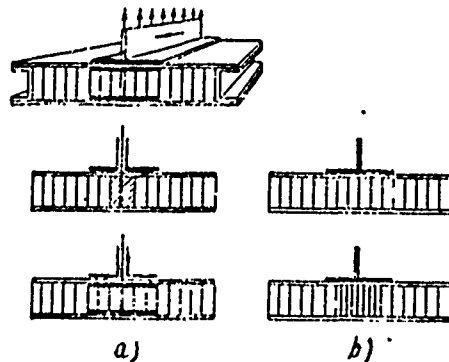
Design of Joints for Transmitting a Lateral Force to a Three-Layer Panel
